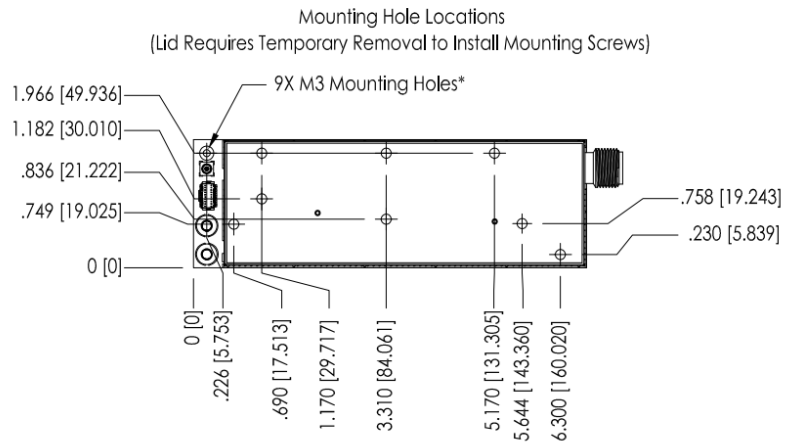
Outline drawing showing the locations of the 9 mounting holes on the ZHL-2425-250X+ (.124in. Dia.), 8 under the cover, sized for M3 socket or pan head screw with head Diameter 5.4 - 5.6 mm
